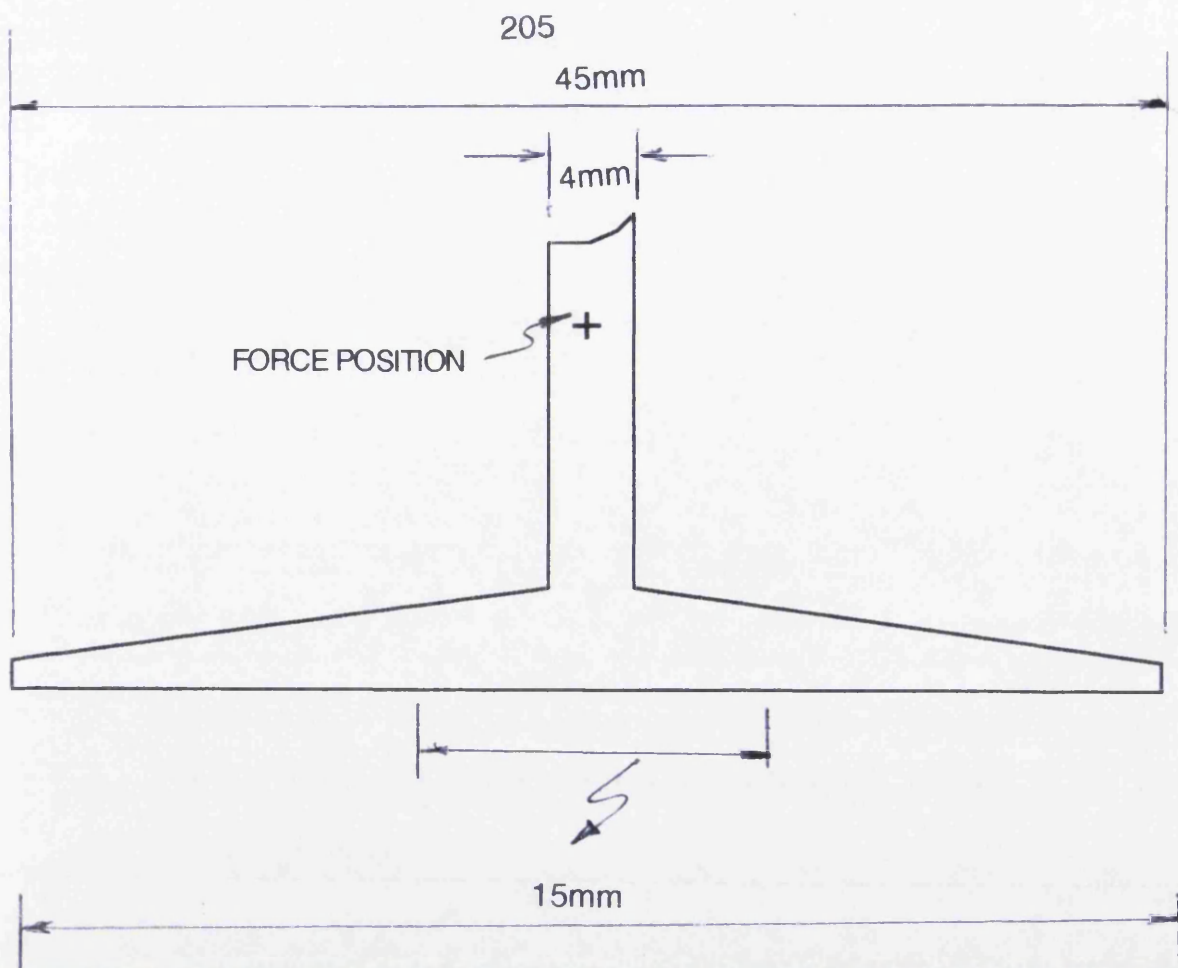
FRACTURE STIFFENER SURFACE OF CLEAVAGE SPECIMEN (TYPE 2)
